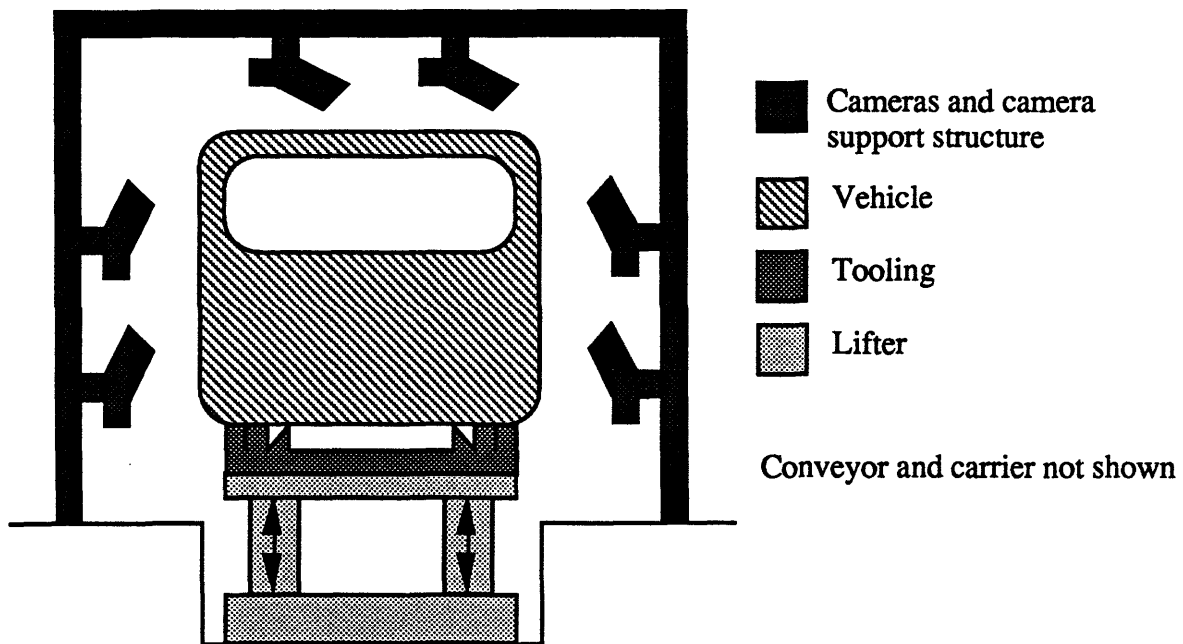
Cross-section of Typical OCMM Station with Mechanical Fixturing
